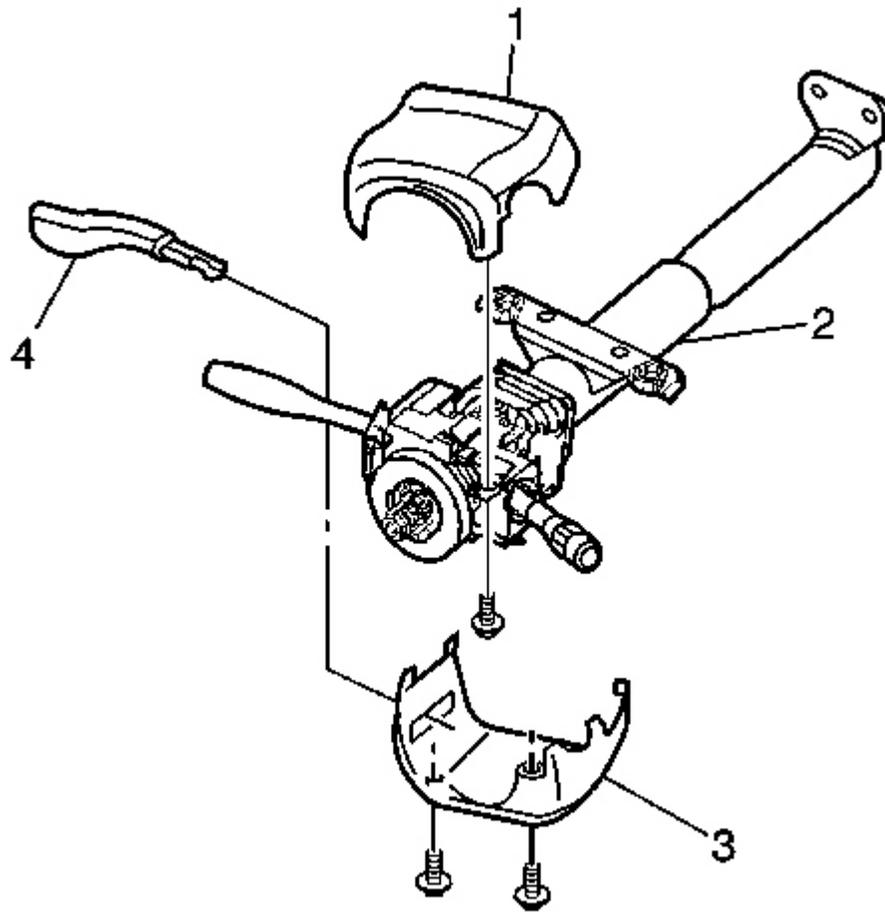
Driver Knee Bolster Trim Panel At Steering Column Covers
